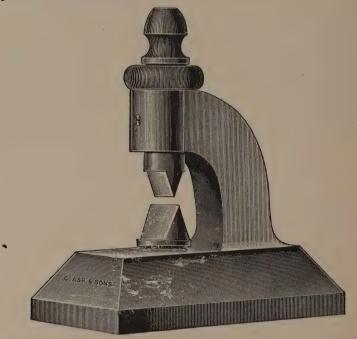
Cutting Tool for shortening tube teeth — full size.
